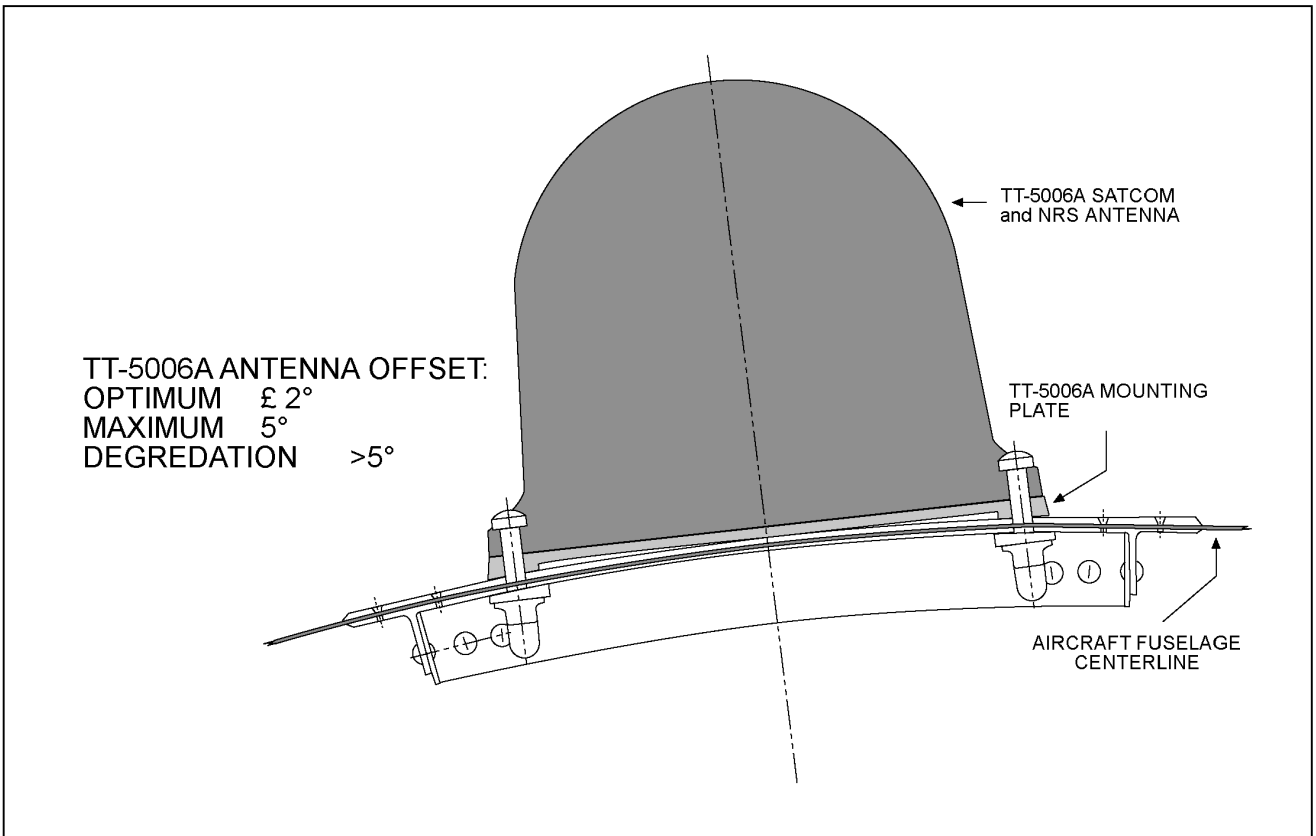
, Mounted TT-5006A Antenna cutaway drawing
